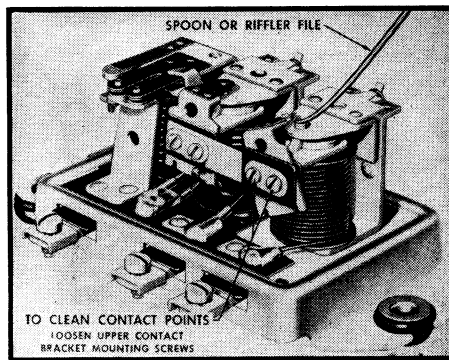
Cleaning Delco-Remy regulator contacts. To reach the contacts, loosen the contact bracket mounting screws and tilt the bracket to one side
